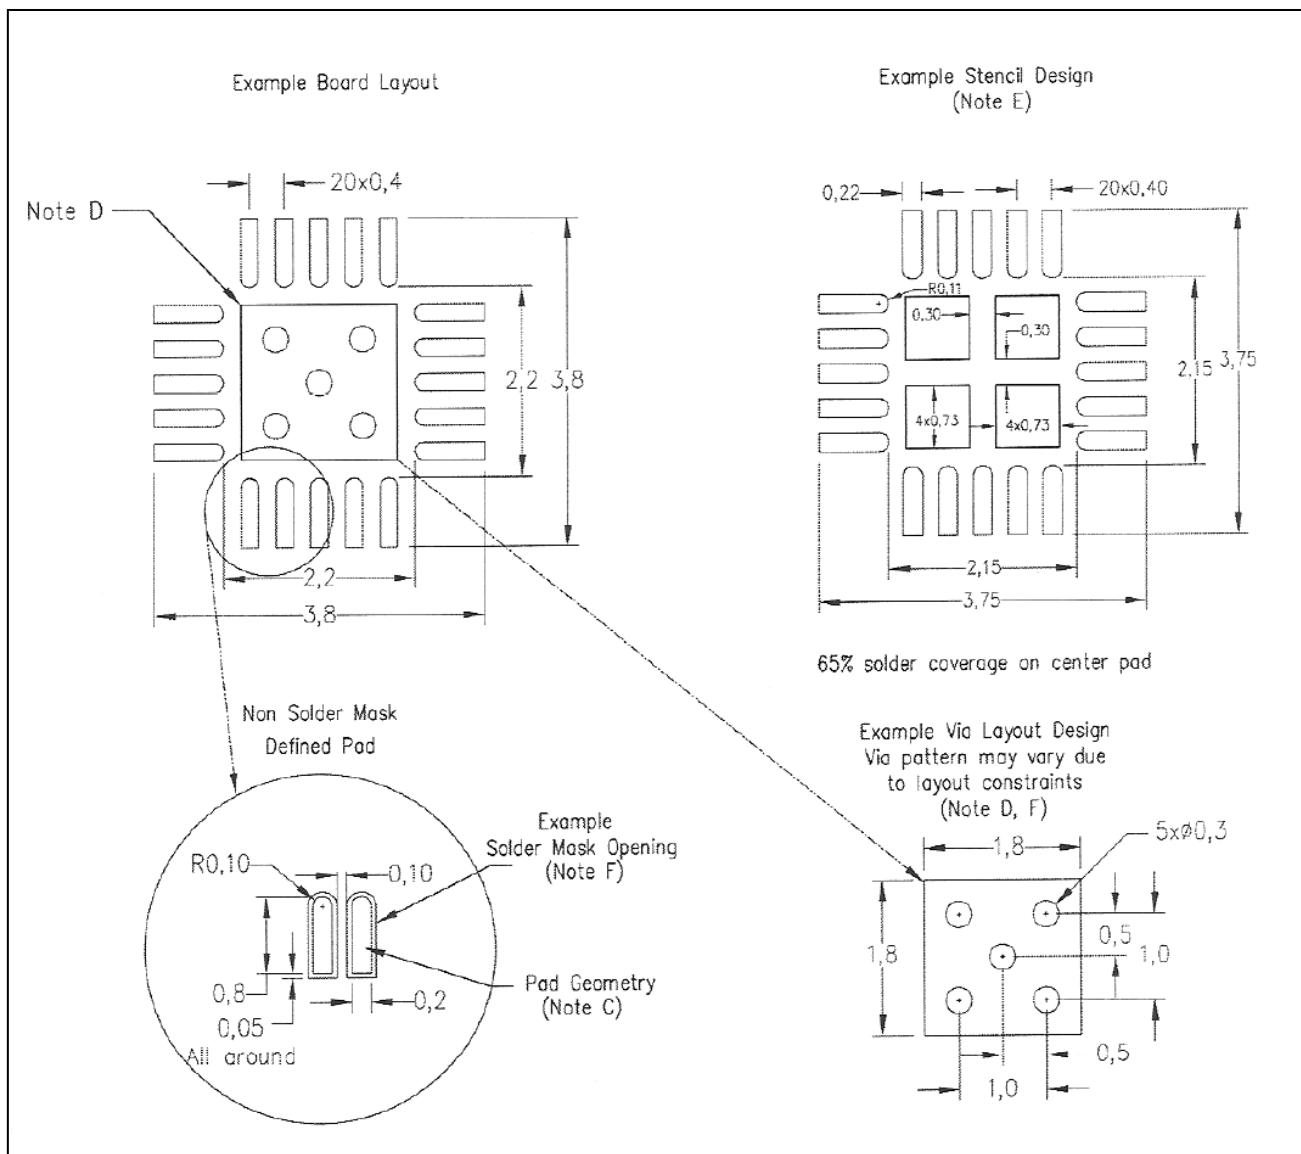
TRX_024_06 Package Footprint and Example Stencil Design
